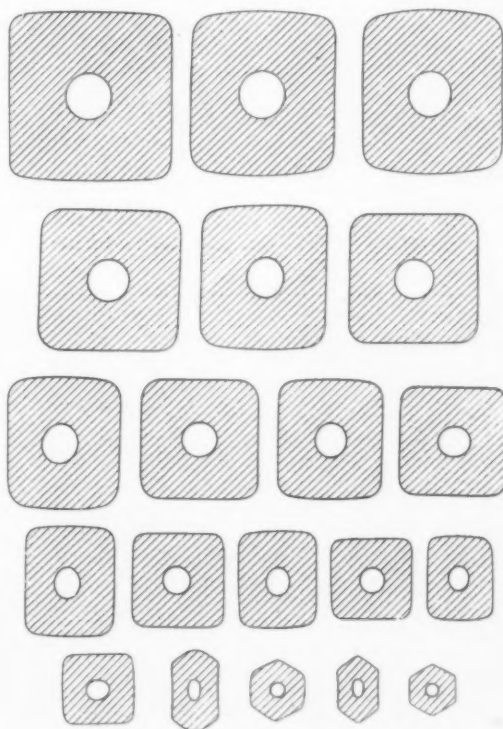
Stages in the rolling of 1 in. hexagon bars.
